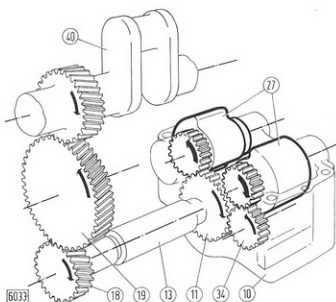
Layout of the Flyweight Type Dynamic Balancer
